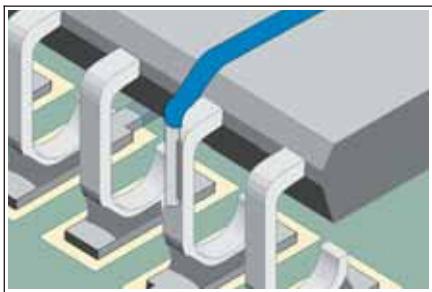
Acceptable Wire soldered parallel to component lead.
